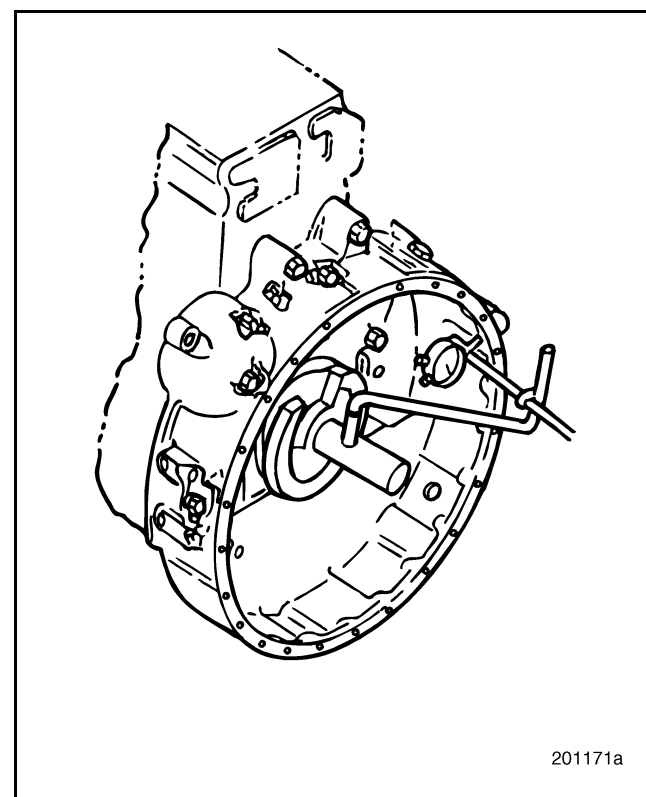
Flywheel Housing Runout Check with Dial Indicator
